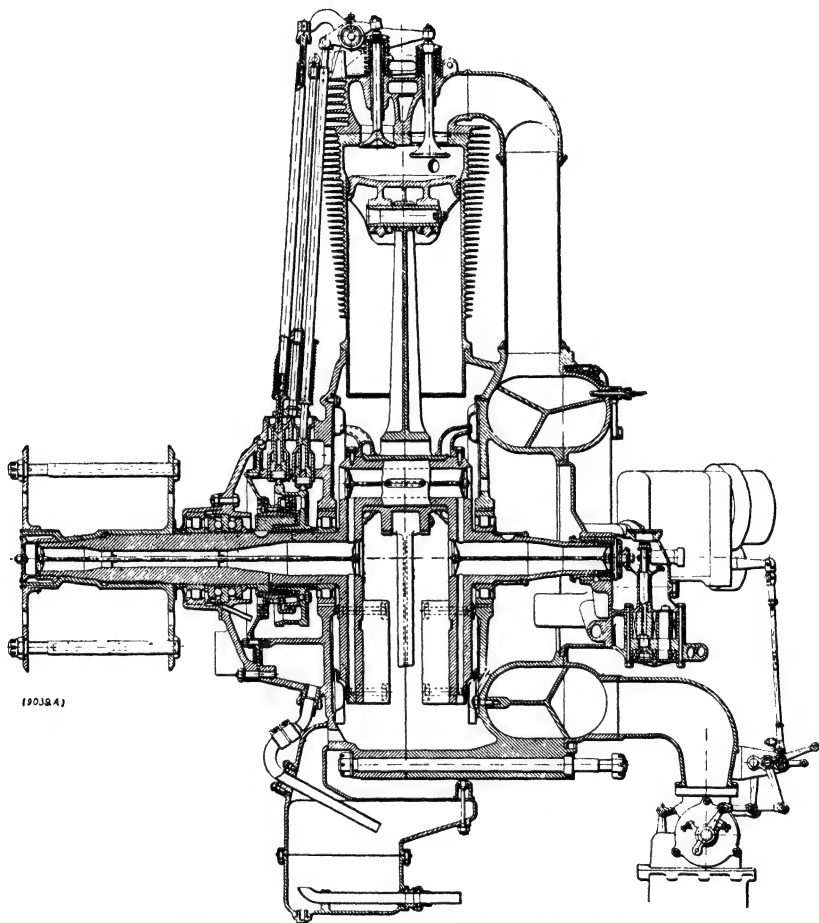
Sectional View of 400 h.p. Bristol Jupiter Aeroplane Engine
